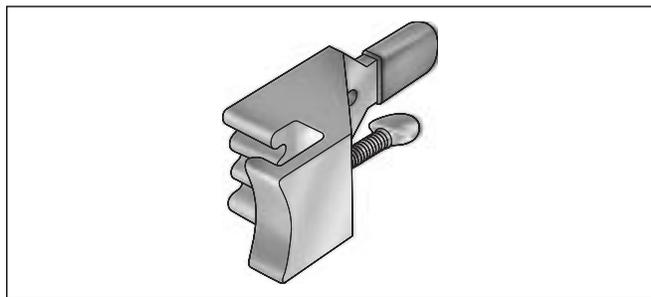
Final Drive Sprocket Locking Tool (Part No. HD-41184)
